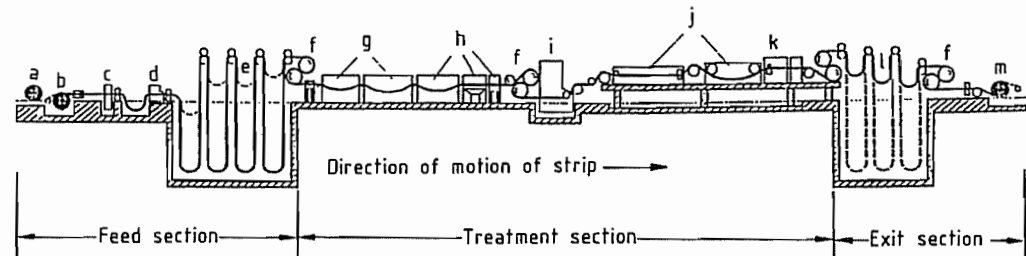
Annealing/pickling line for stainless steel: a) Pay-off reel 1; b) Pay-off reel 2; c) Welding machine; d) Trimming shears; e) Looper 1; f) Roll stand; g) Furnaces; h) Cooling zone; i) Abrasive blasting; j) Pickling; k) Spray washing; l) Looper; m) Take-up reel.
